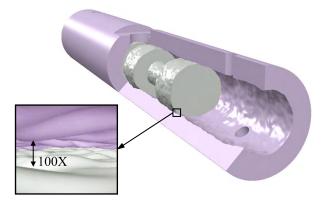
Assembly simulation of non-ideal geometric model of valve 1.
